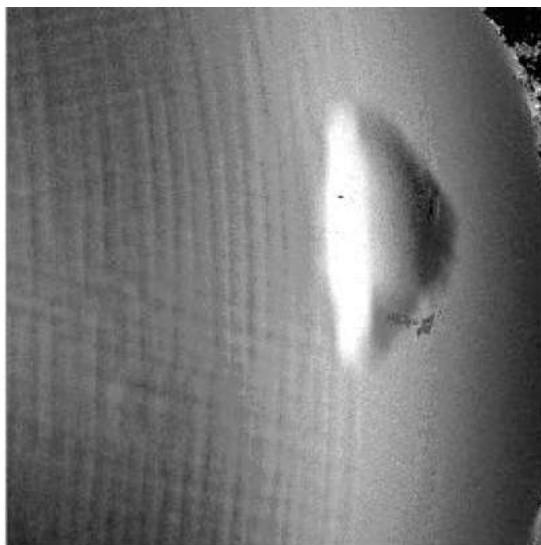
Shearography Image of Large (11.4 x 3 ft) Aluminum Honeycomb Aircraft Flap Test in 18 Shearography Tests Using Vacuum Stress
